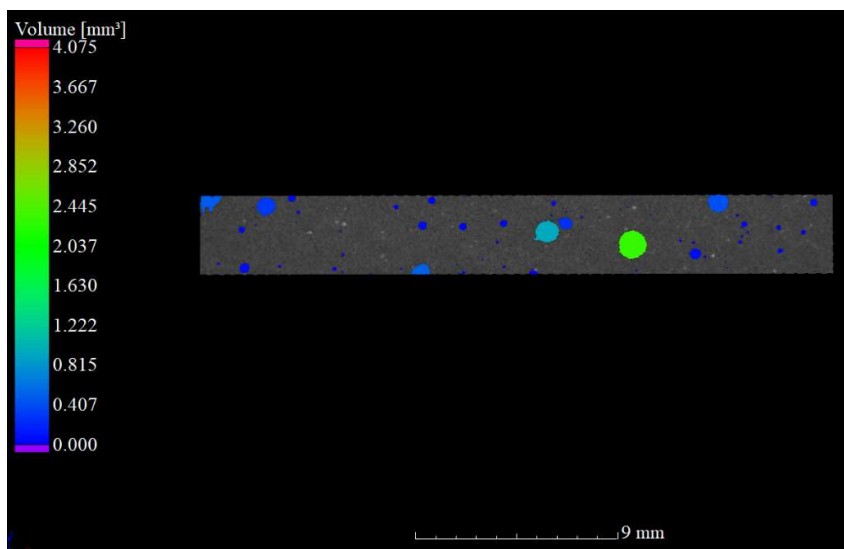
Enlarged side view image presenting the pore sizes of the sample.
